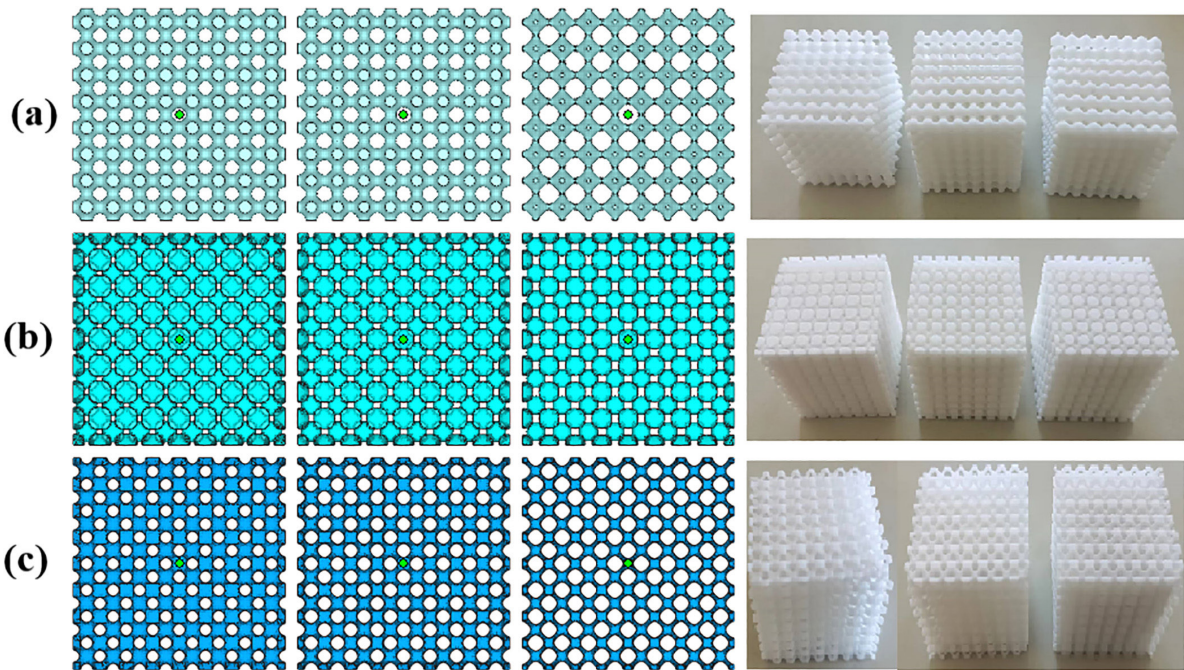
Design models and printed samples: (a) primitive; (b) I-WP; (c) P-I.
